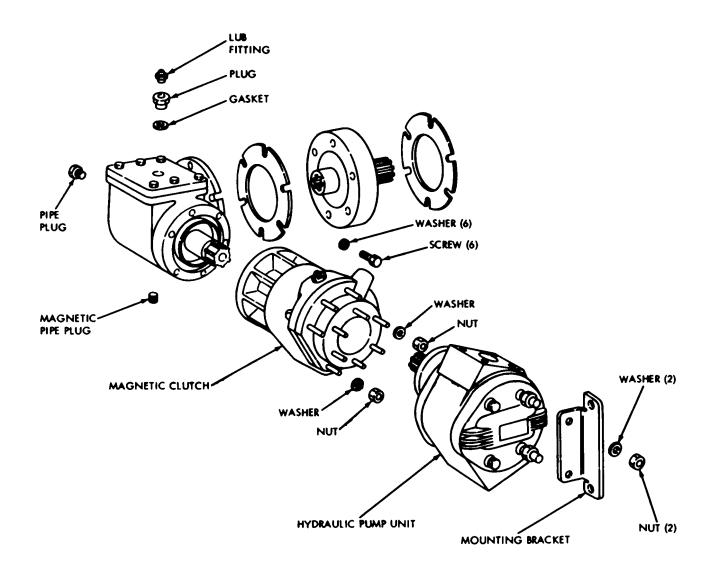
Removal or installation of hydraulic pump and drive assembly (sheet 3 of 3).
